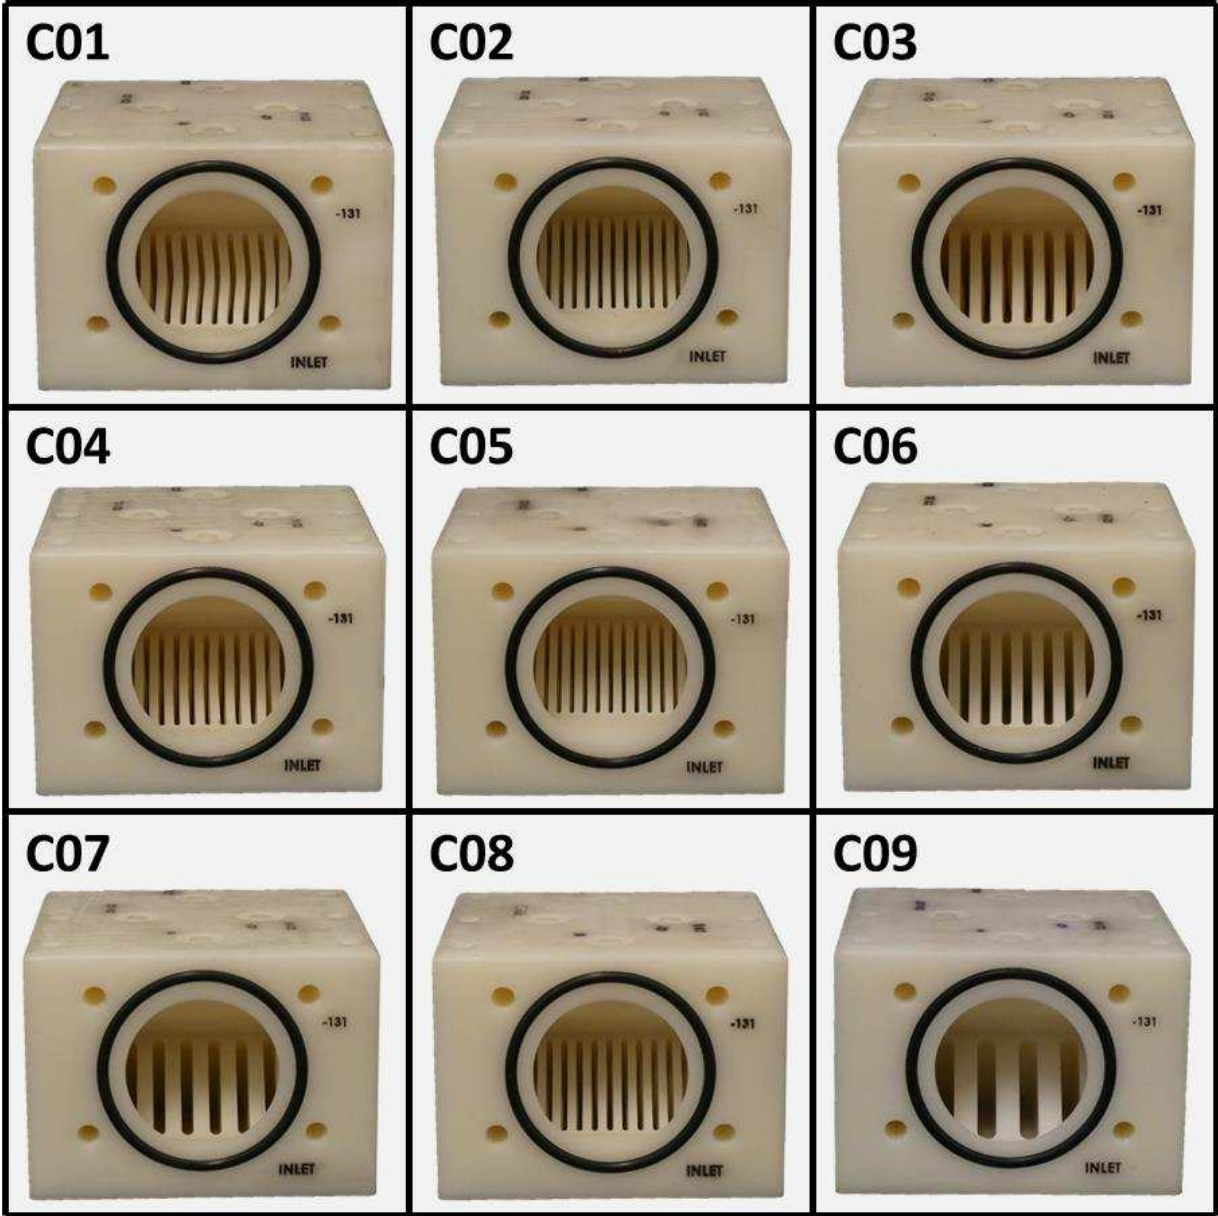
Inlet view of C01 thru C09 as-fabricated impingement test sections
